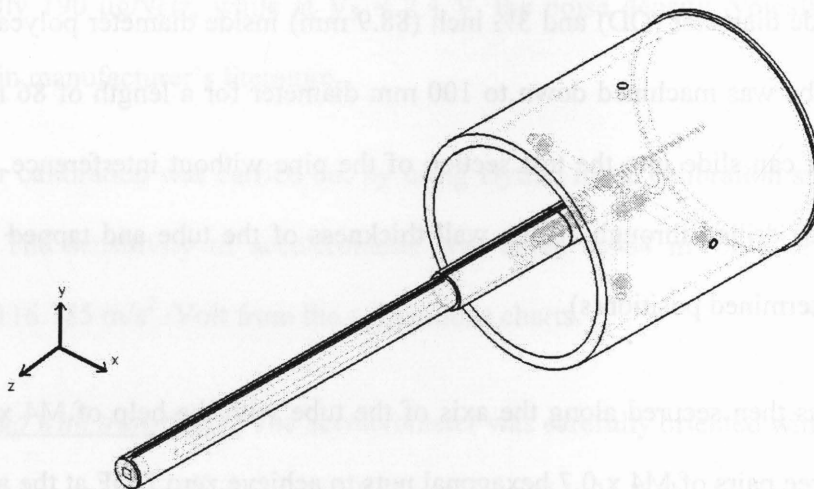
Isometric view of the test-fixture for the cantilever
